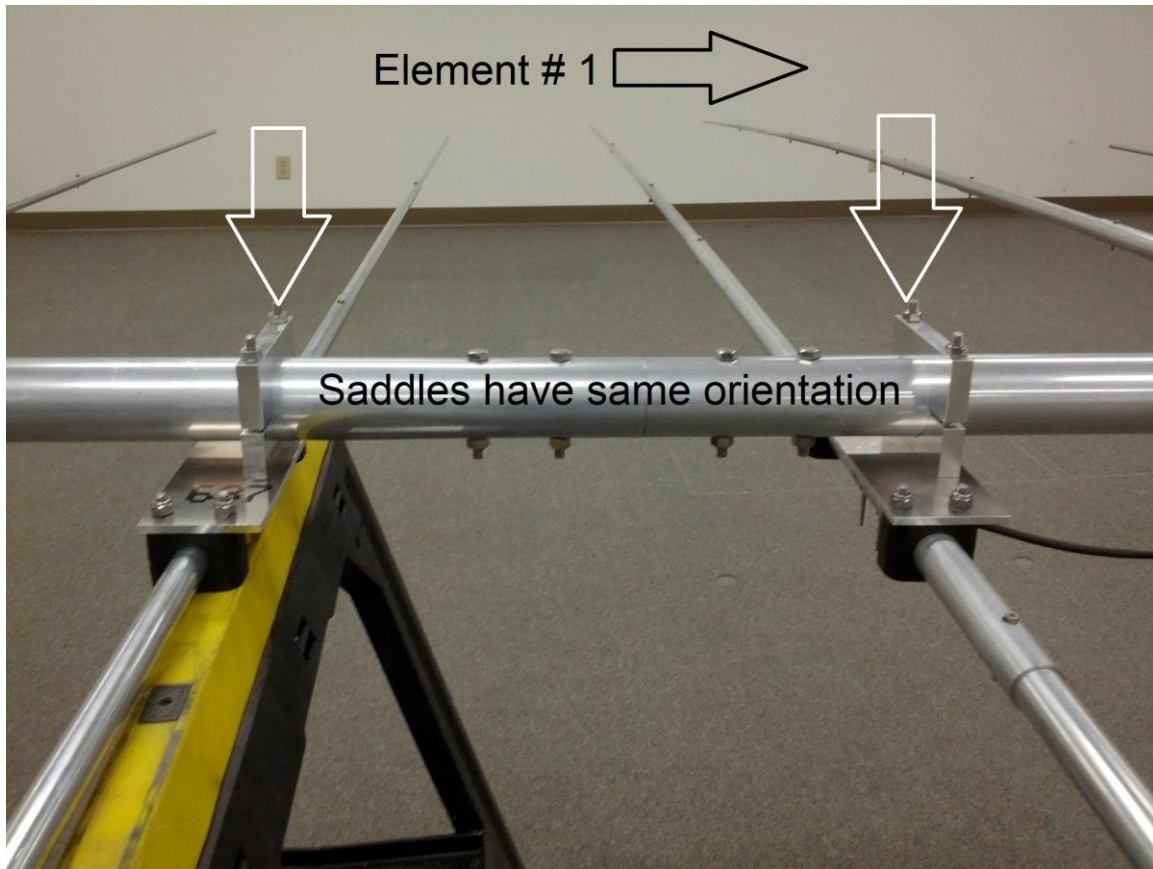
Element to boom mounting arrangement (10 Meters shown). A pair of billet aluminum saddle clamps is placed around the boom and a pair of hex bolts passes through the plate and saddle clamps to firmly clamp the plate to the boom. The precision CNC made clamps provide a larger, even clamping surface.
